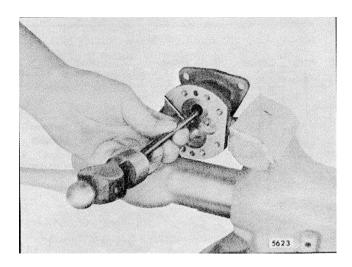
Removing Oil Seals using Tool J 1508- 13
